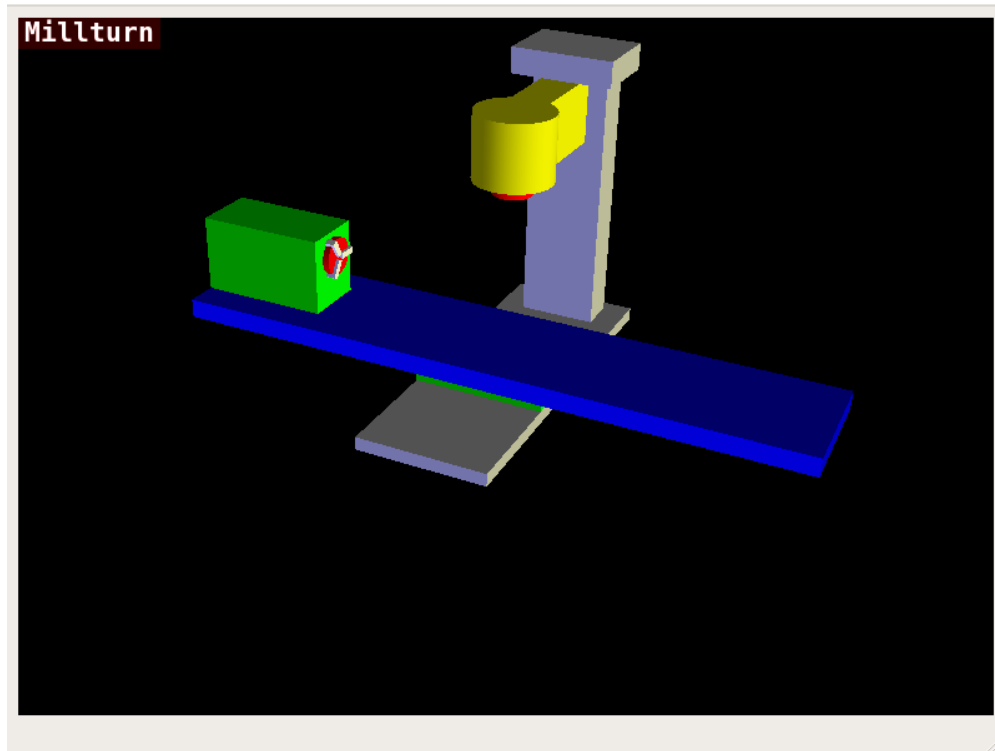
QtVCP vismach_millturn - 4 Axis MillTurn 3D View Panel
